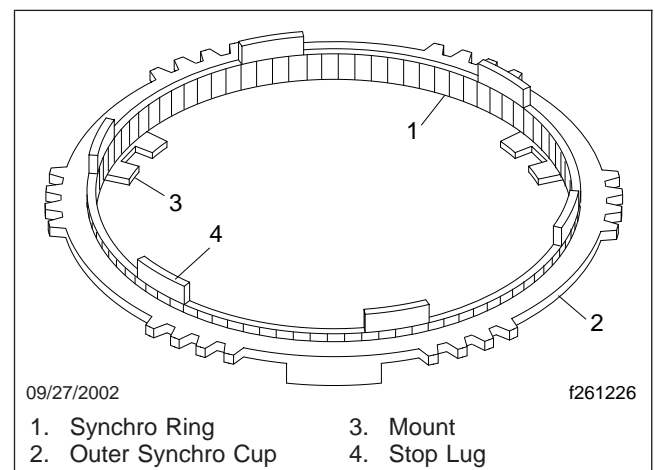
, 4th Gear Synchro Ring and Outer Cup
